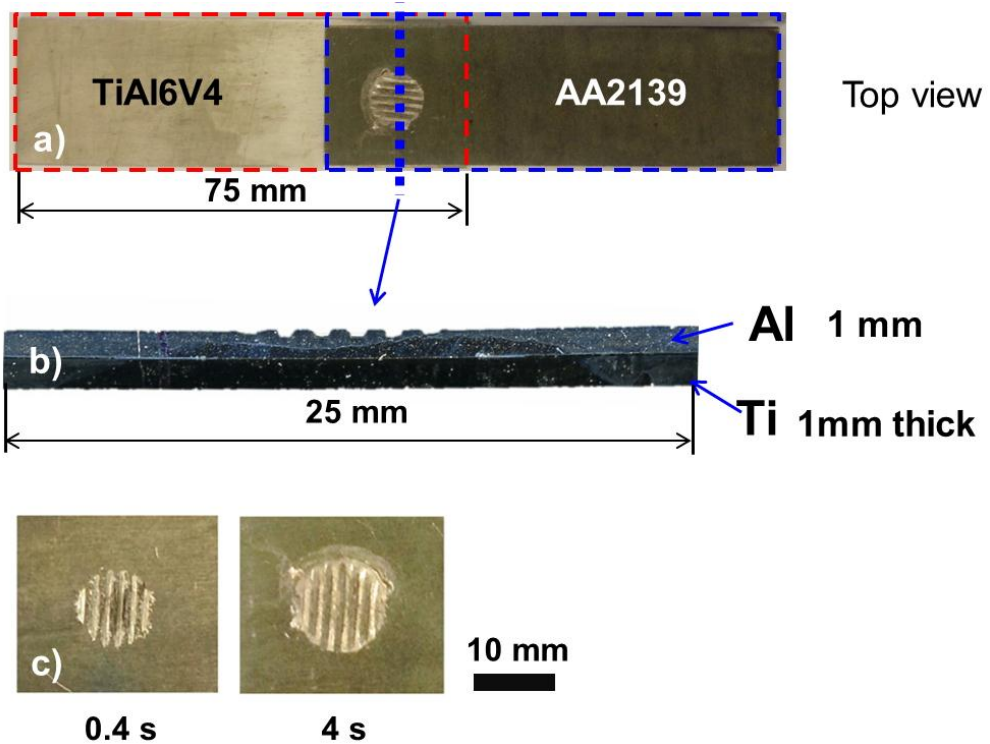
(a) Weld appearance of a typical USW weld, welding time 4 s, welding energy 4120 J, (b) Macrostructure of cross-section of a typical USW weld, welding time 4.0 s, welding energy 4120 J, (c) Influence of welding time on welding time indent area, sample photos (aluminum side).
